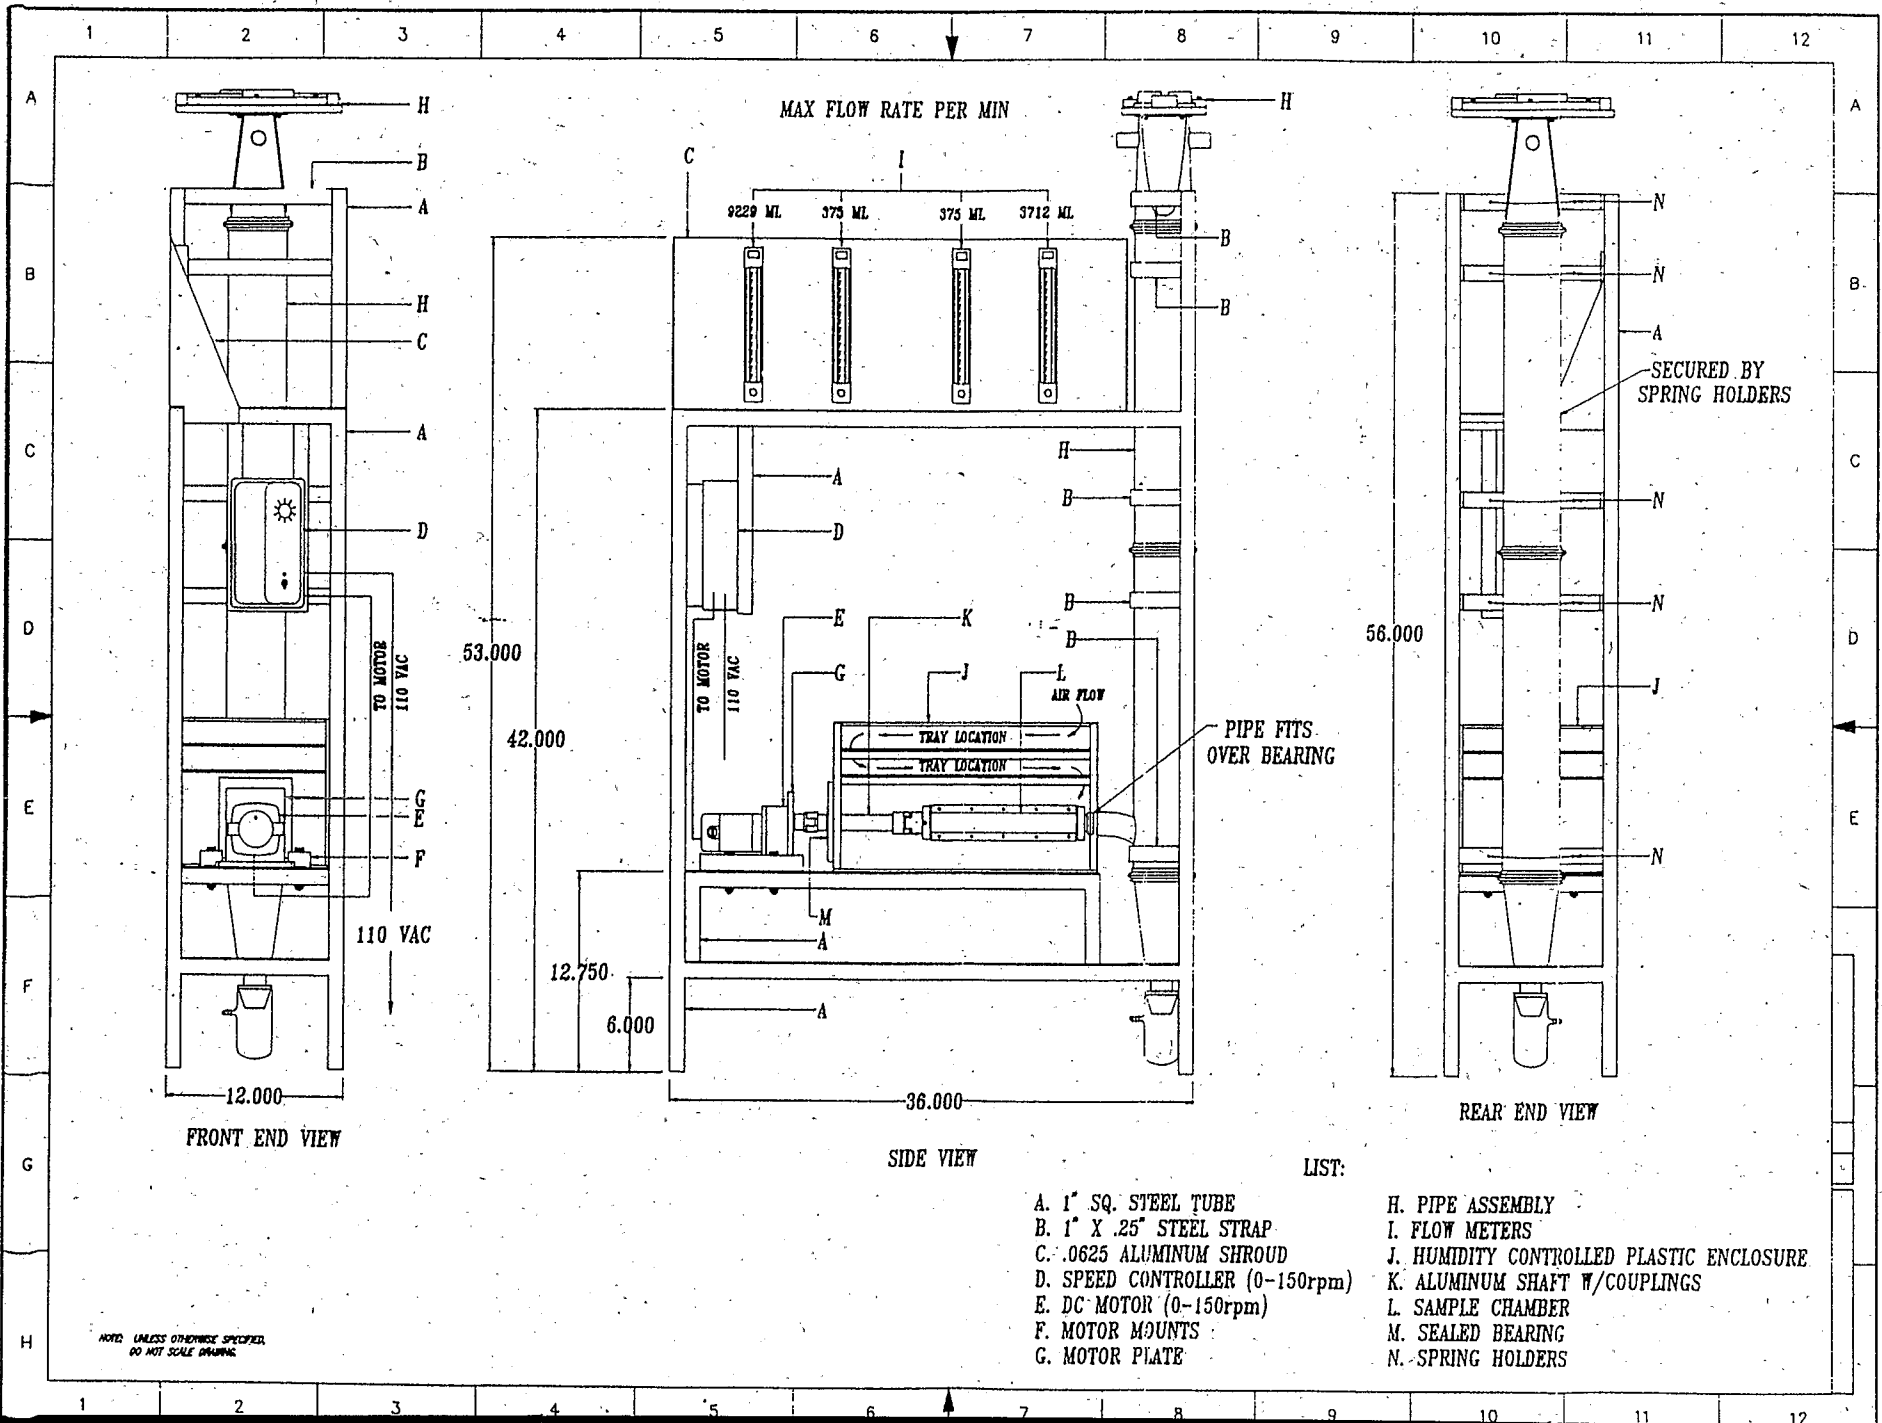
PROTOTYPE TUMBLER ASSEMBLY DETAIL
